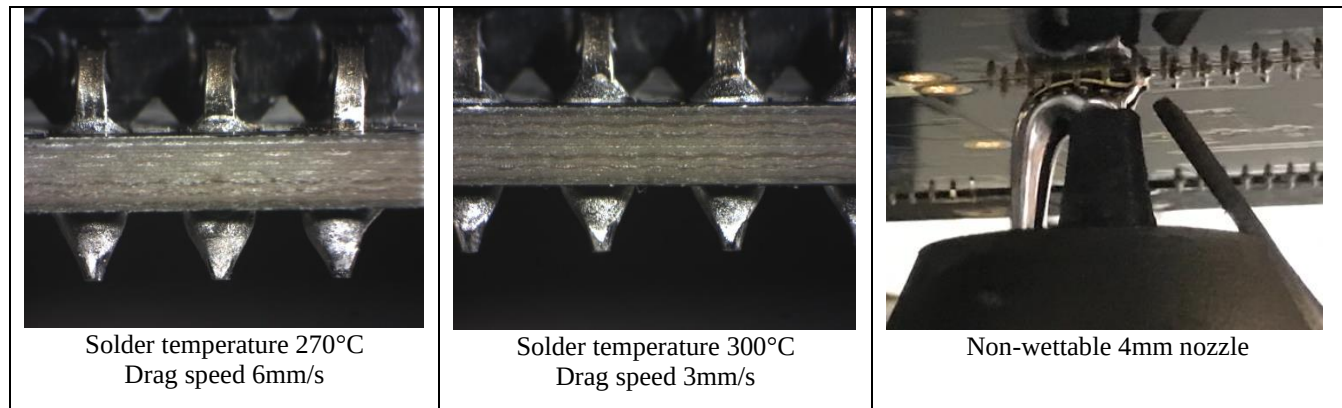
Soldering with this alloy is good at 270 but better at 300 °C for test board 1.
